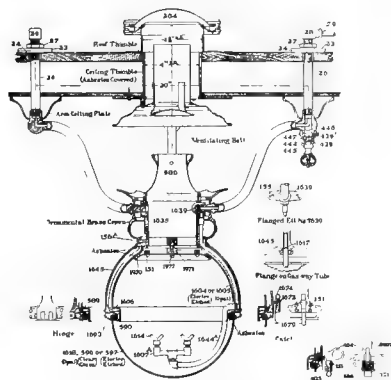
Section Through Acetylene Lamp No. 1627.
